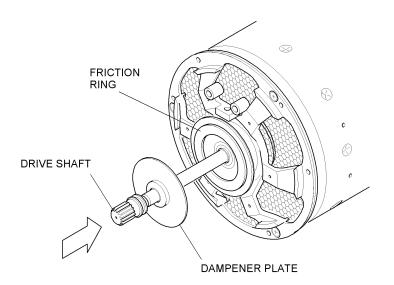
Inserting Drive Shaft into Armature Shaft
